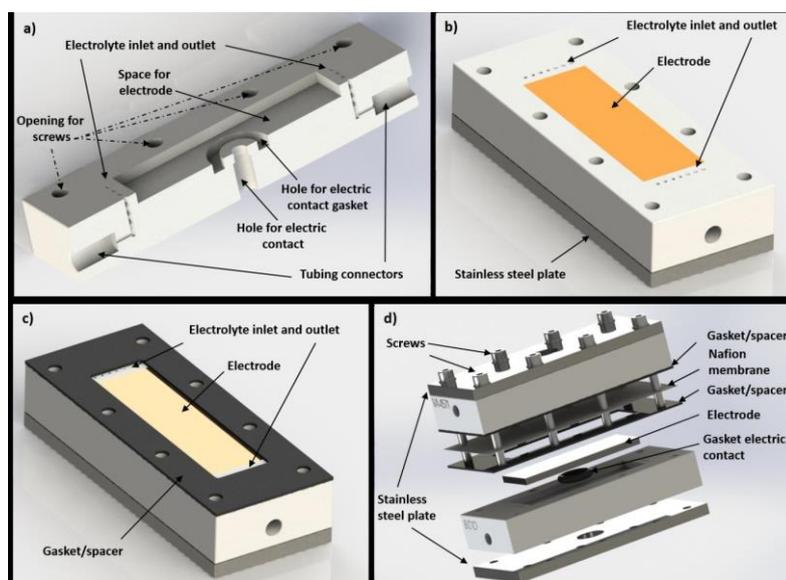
ElectraSyn Flow design. a) cross-section of the Teflon piece. b) complete half-cell with Teflon piece, electrode and back plate. c) complete half-cell with gasket. d) exploded view of total reactor
